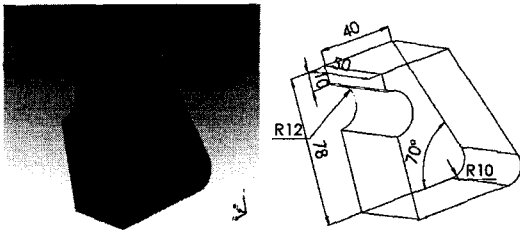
The mesh and dimensions of the specimen (unit: mm)
